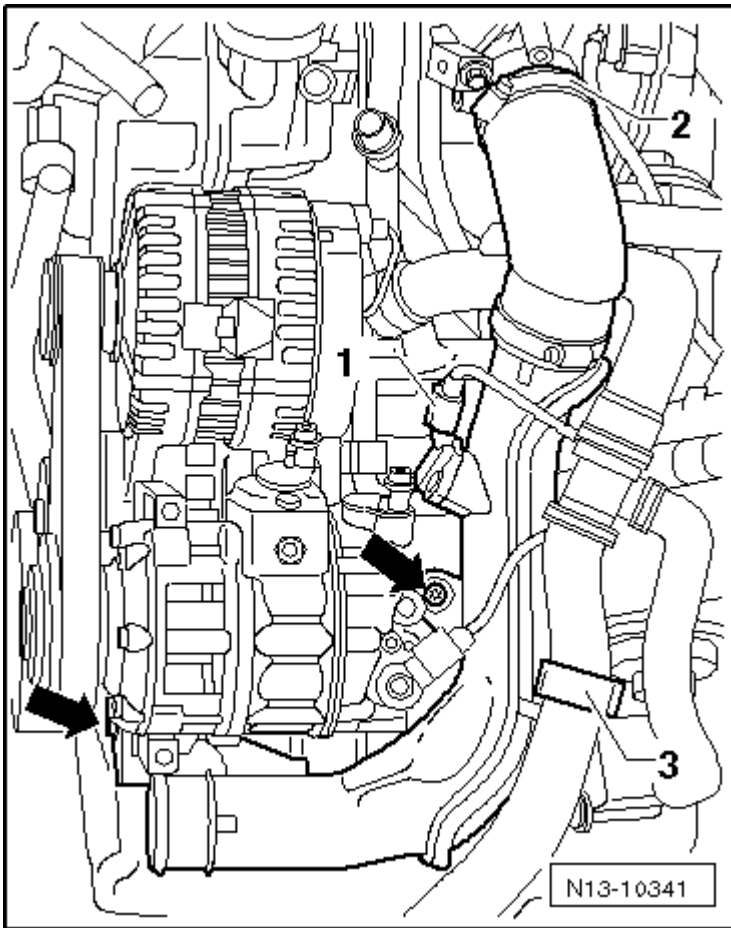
Identifying Connector -1-, Clamp -2 And Coolant Hose -3-
